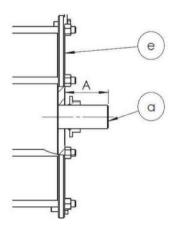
LPS -Distance "A" with standard stopper bolt mounted.
